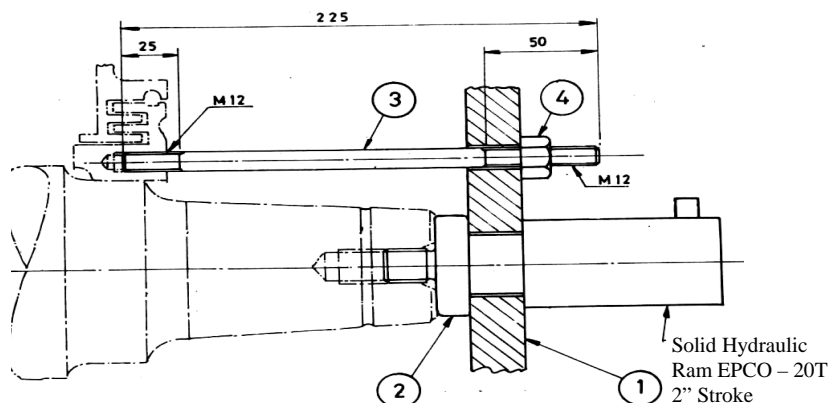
EXTRACTOR FOR BEARING WIPER PE (Tool No. 1405399)
